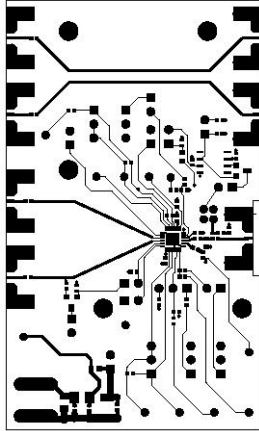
MAX3795 EV Kit PC Board Layout—Component Side
